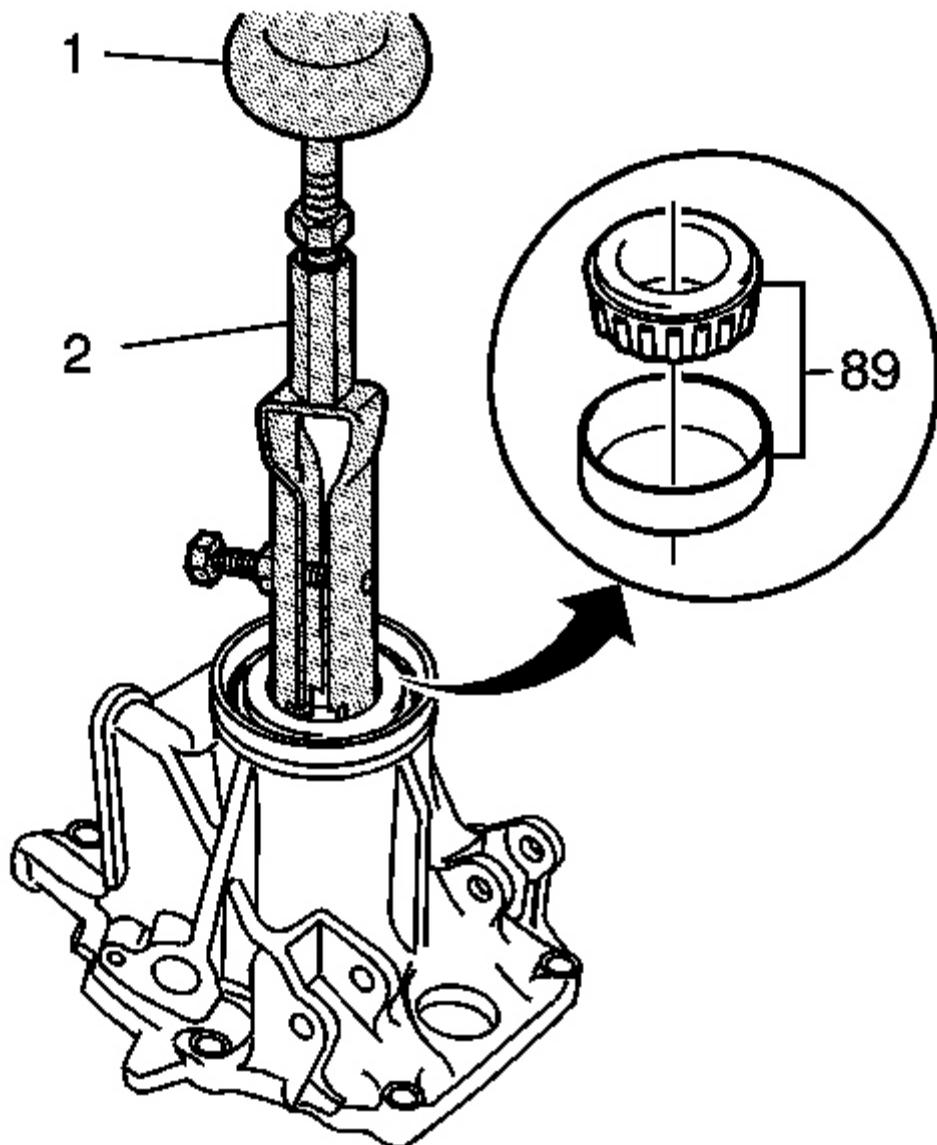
Removing Rear Output Shaft Bearing Assembly
